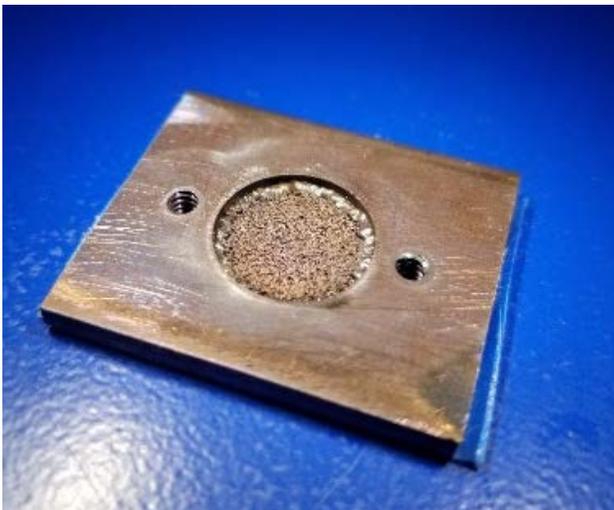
STAINLESS STEEL SHIM WITH WELDED SINTERED DISC
